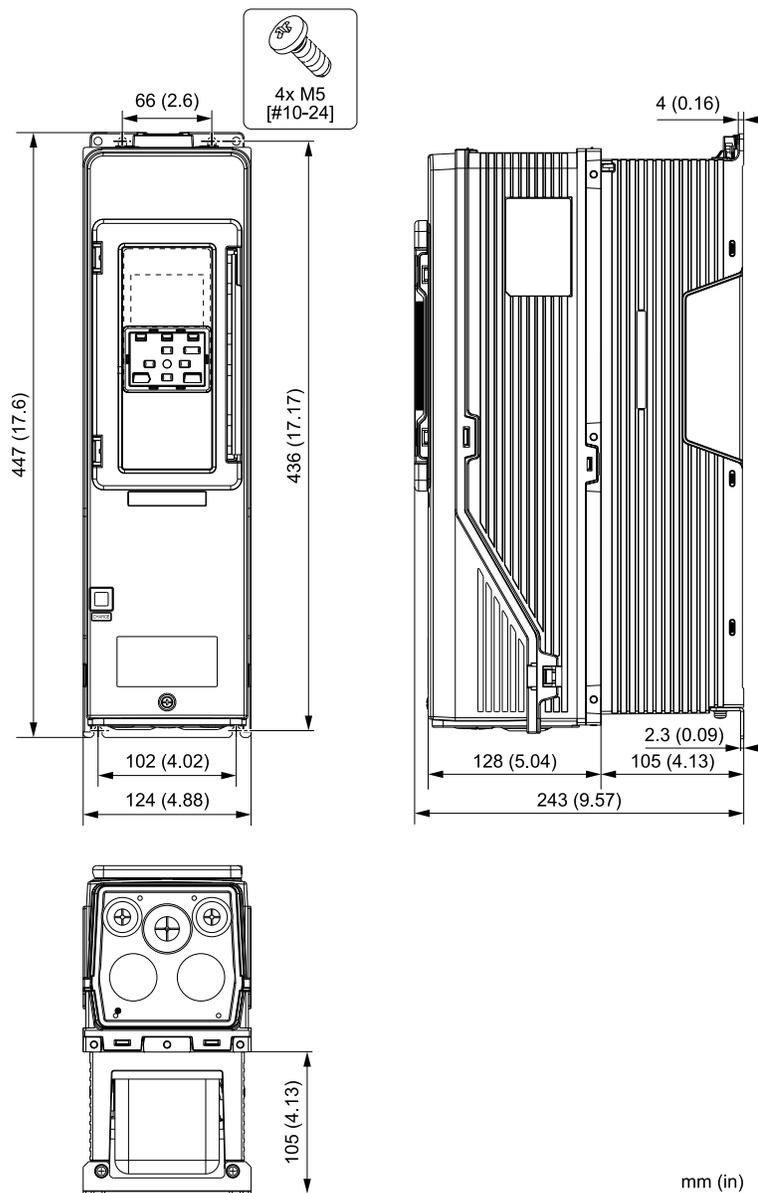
Exterior and Mounting Dimensions Diagram 3
